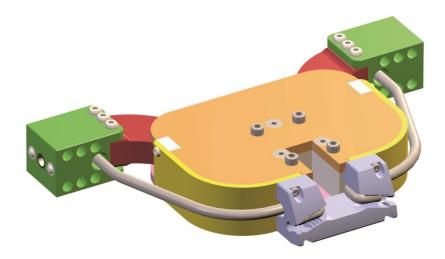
ES-2re Shoulder Assembly, Rear View (Note Elastic Cord Holder and Routing of Cords)
